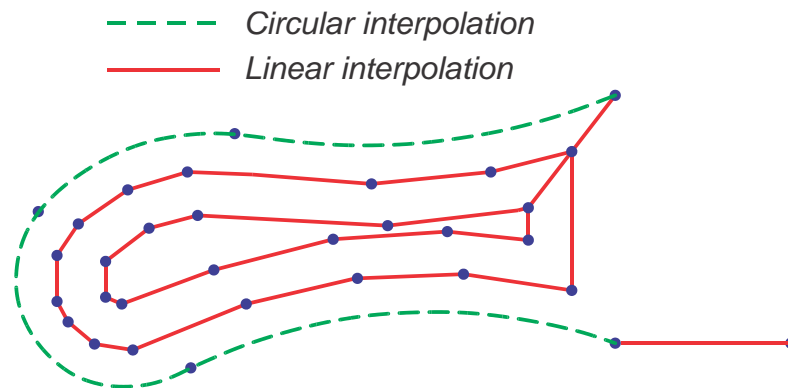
Generated tool paths by Mastercam X6 for tool diameter of 0.794 mm
